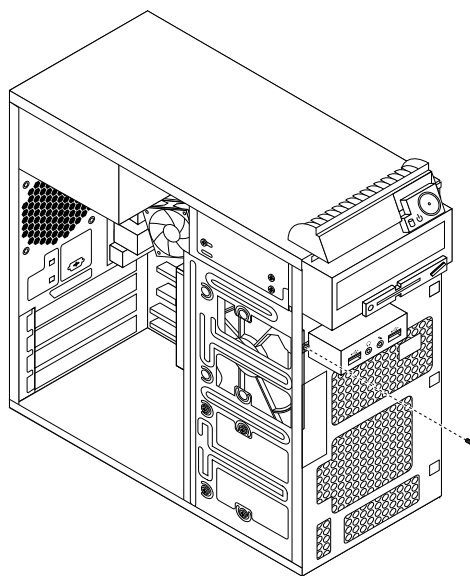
Removing the screw that secures the front audio and USB assembly to the chassis
